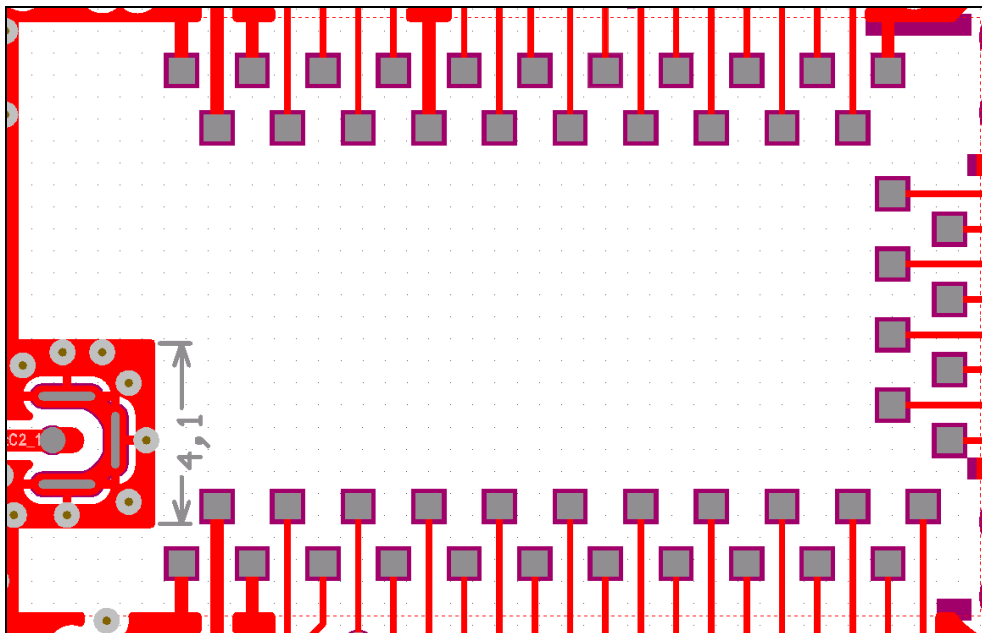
Exemplary base board footprint for deRFsam3-23M10-2 (top view)
